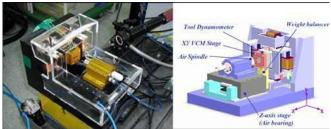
Diagram and photograph of a three-axis meso milling machine [2]
